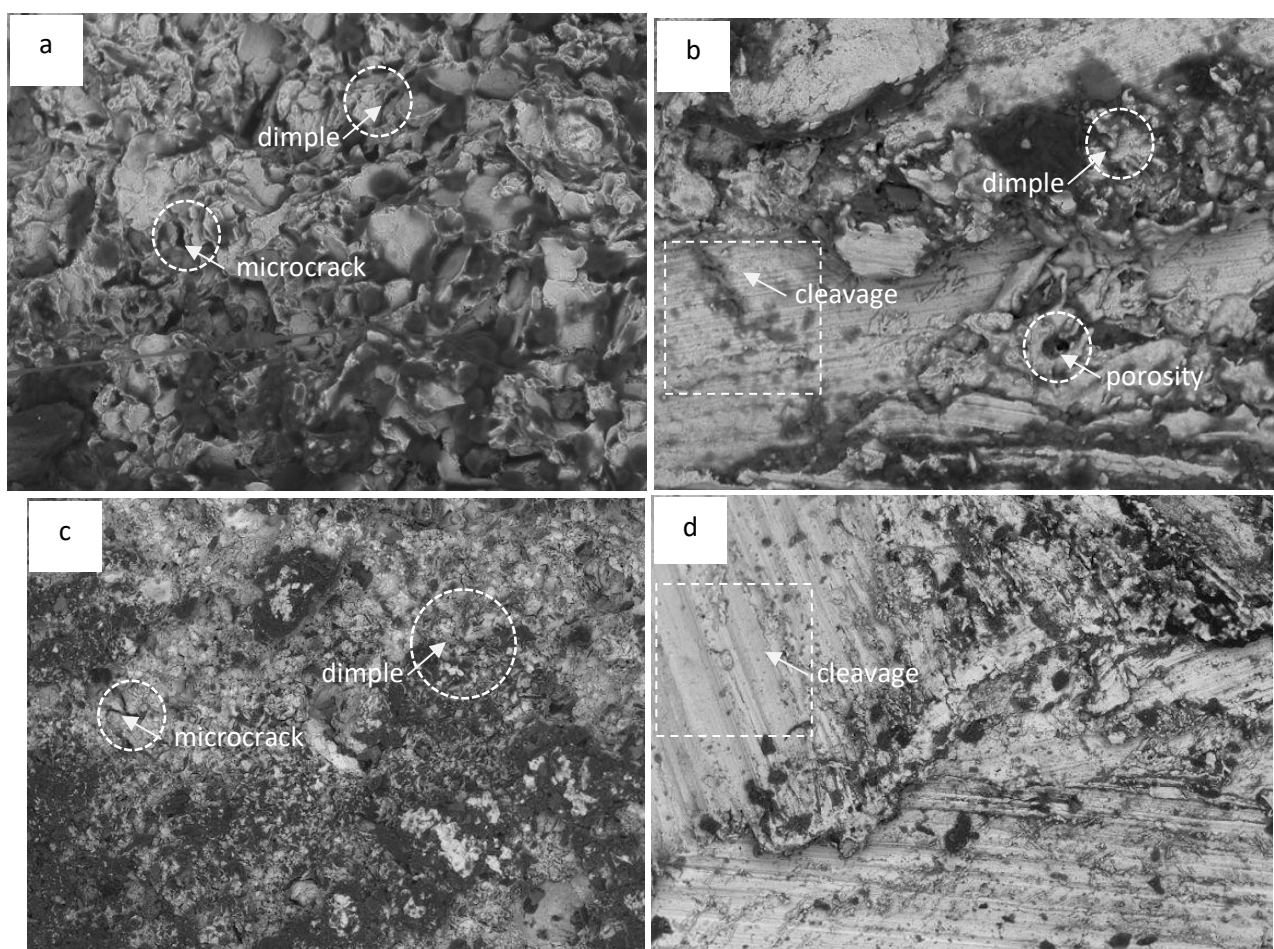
Fracture surface morphology of the Clutch Bracket: a) A356, b) ADC12, c) A356, d) ADC12.
